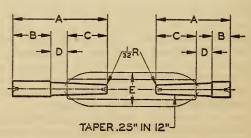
Plain cylindrical plug gages, above 0.150 to 0.240 inch, inclusive
